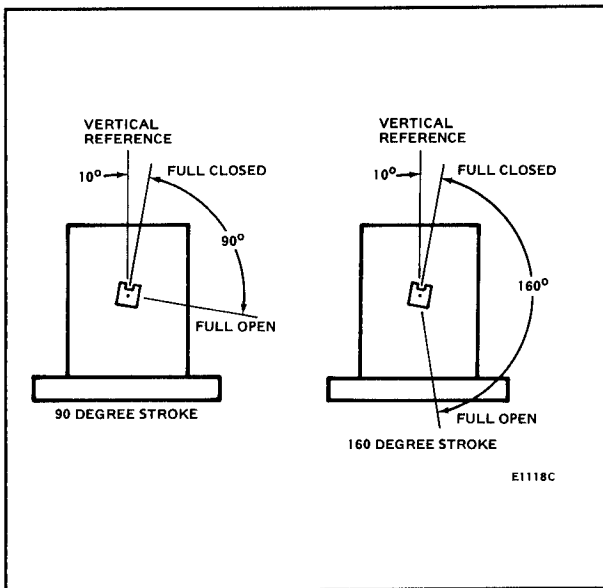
FULL COUNTERCLOCKWISE POSITION OF THE MOTOR SHAFT, AS VIEWED FROM THE POWER END.
